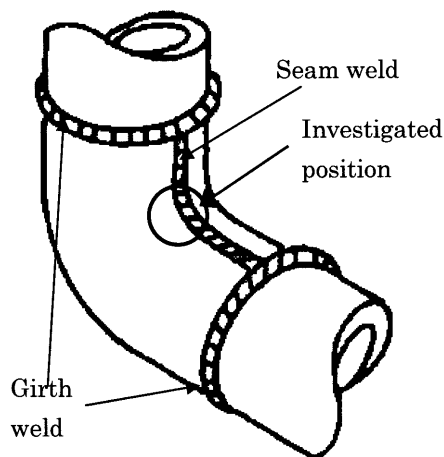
Typical structure of seam welded pipe elbow and the position where investigated in this study.
